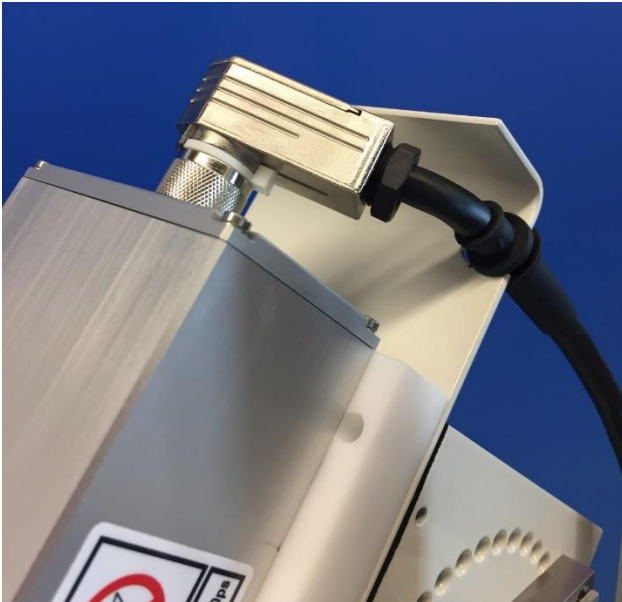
Assembling the connection cable on the sensor. The strain relief sleeve is inserted into the recess in the base plate during cable assembly. The angle of the Amphenol connector can be adjusted (in increments of 45°) as needed once the mounting ring has been loosened.
